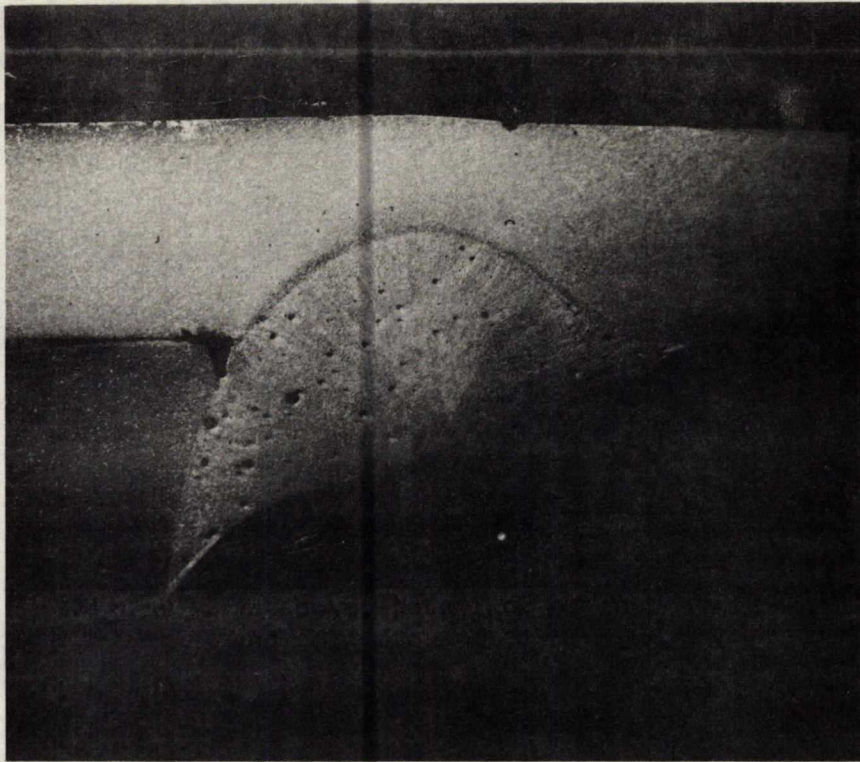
Single pass weld joining tank sheet (above) and sump section (below).
